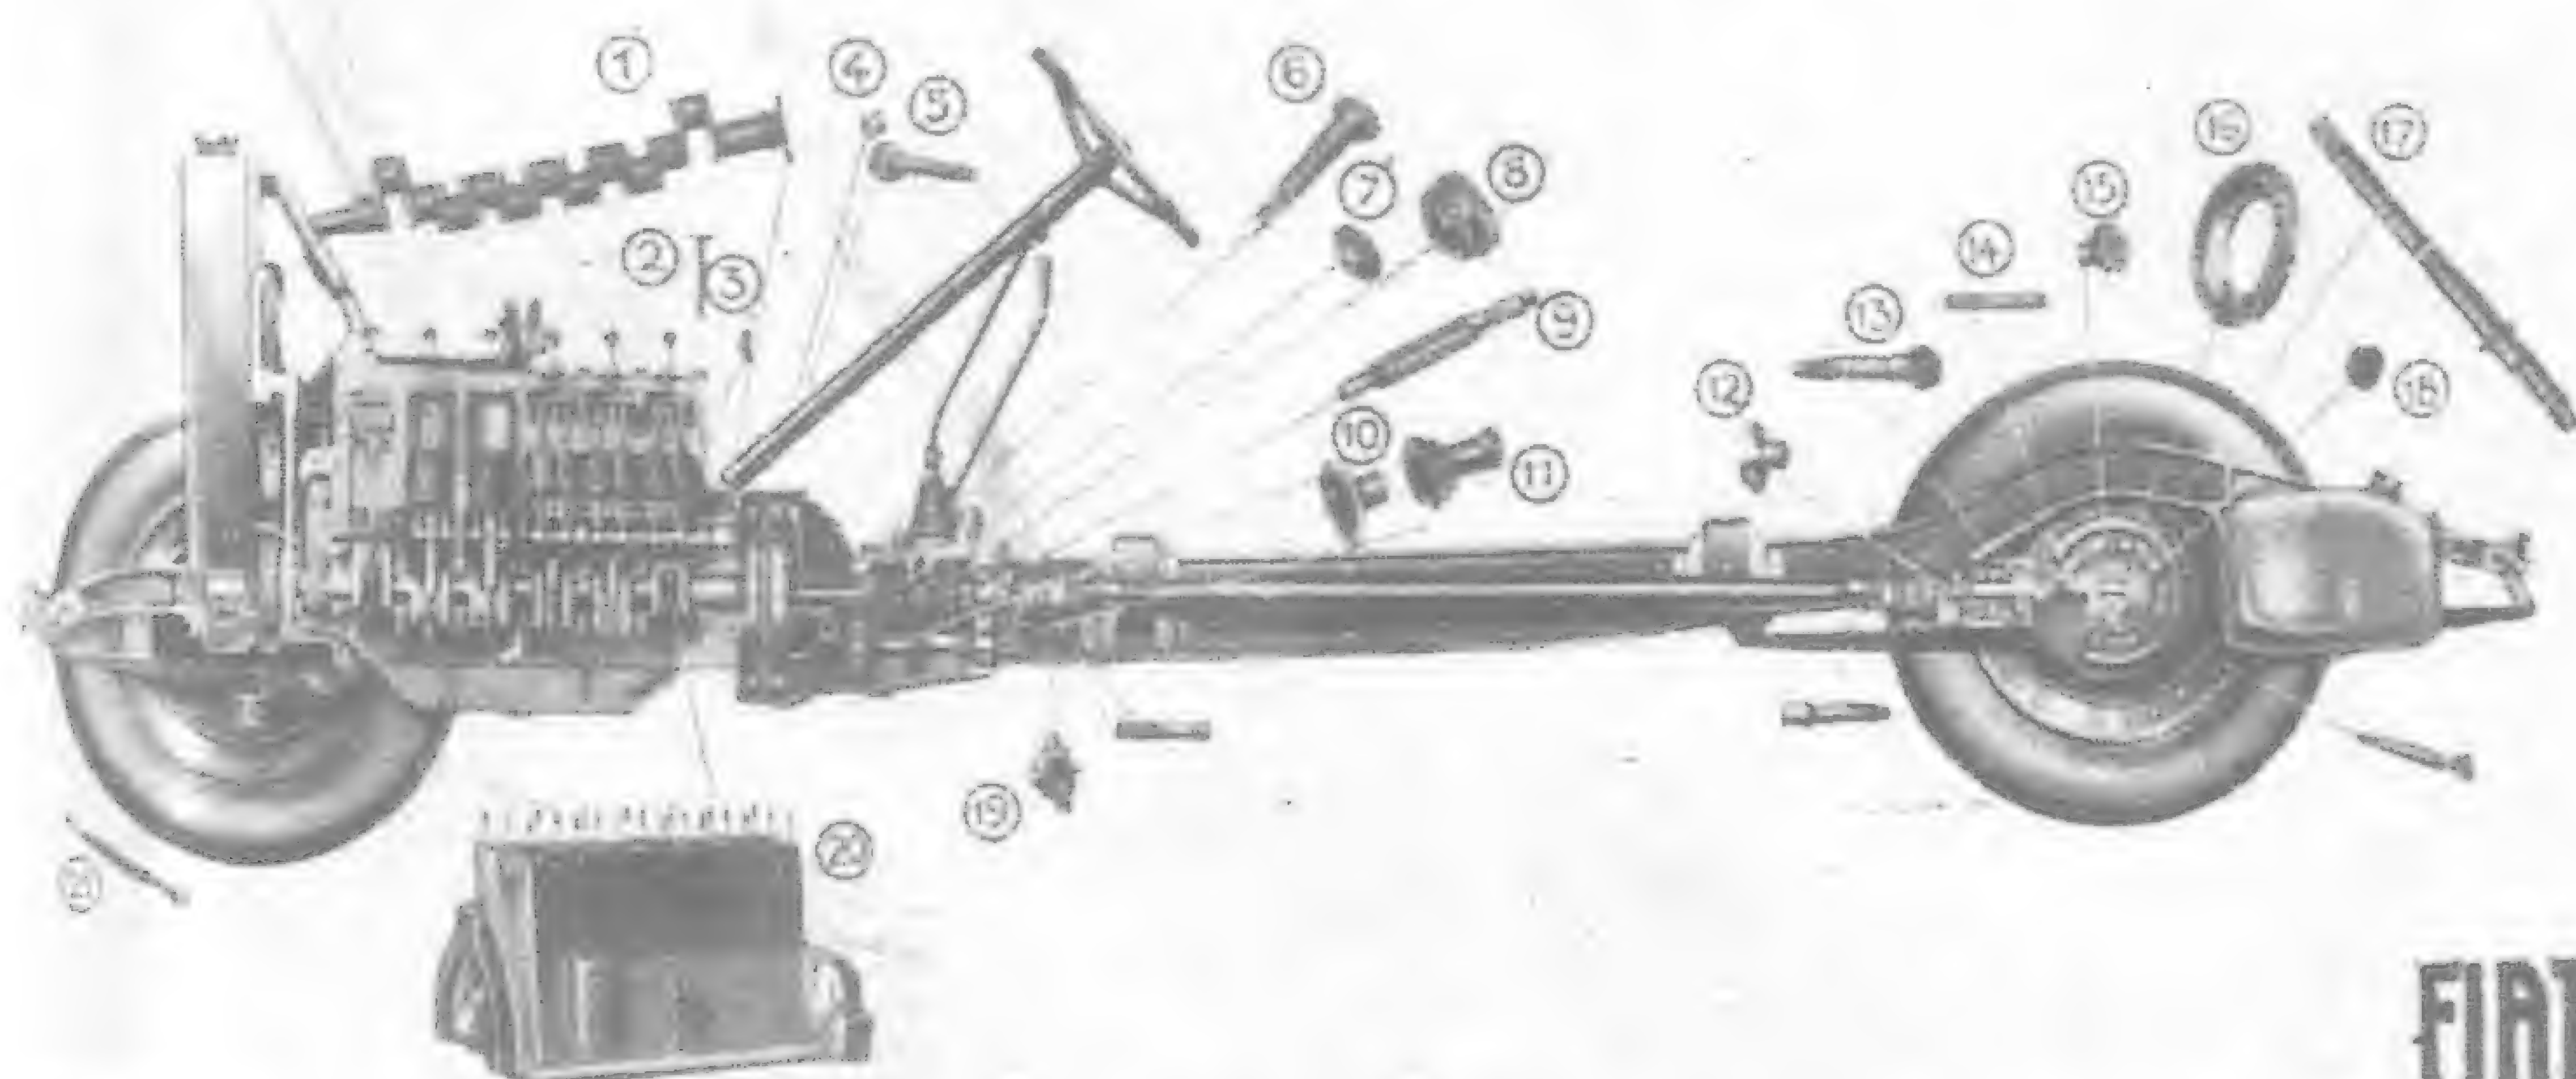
Longitudinal Section of "Fiat" (Model 525) showing interior of engine and parts
